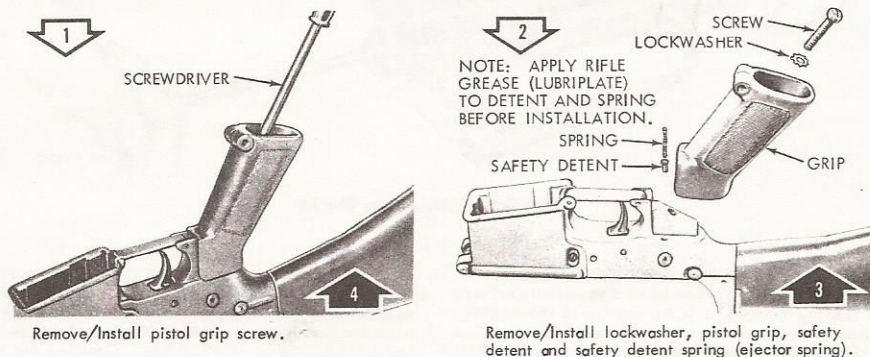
B. Disassembly/Assembly of Lower Receiver Group.
